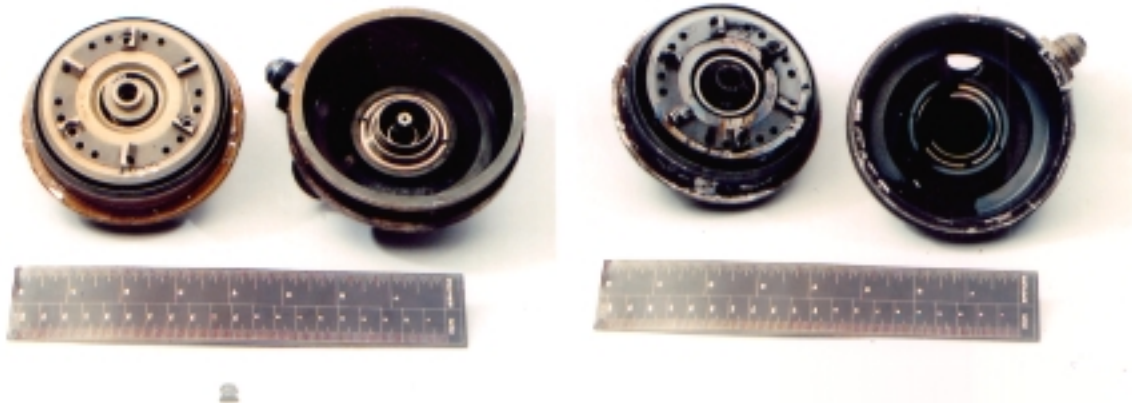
Inside Views of #2 Engine Centrifugal Fuel Purifier (left) and #1 Purifier (right) - Note similar lack of fuel residues on #2 Purifier // Vues de l'intérieur de l'épurateur carburant centrifuge du moteur numéro 2 (à gauche) et de l'épurateur du moteur numéro 1 (à droite); remarquez, ici encore, l'absence de résidus de carburant dans l'épurateur du moteur numéro 2
